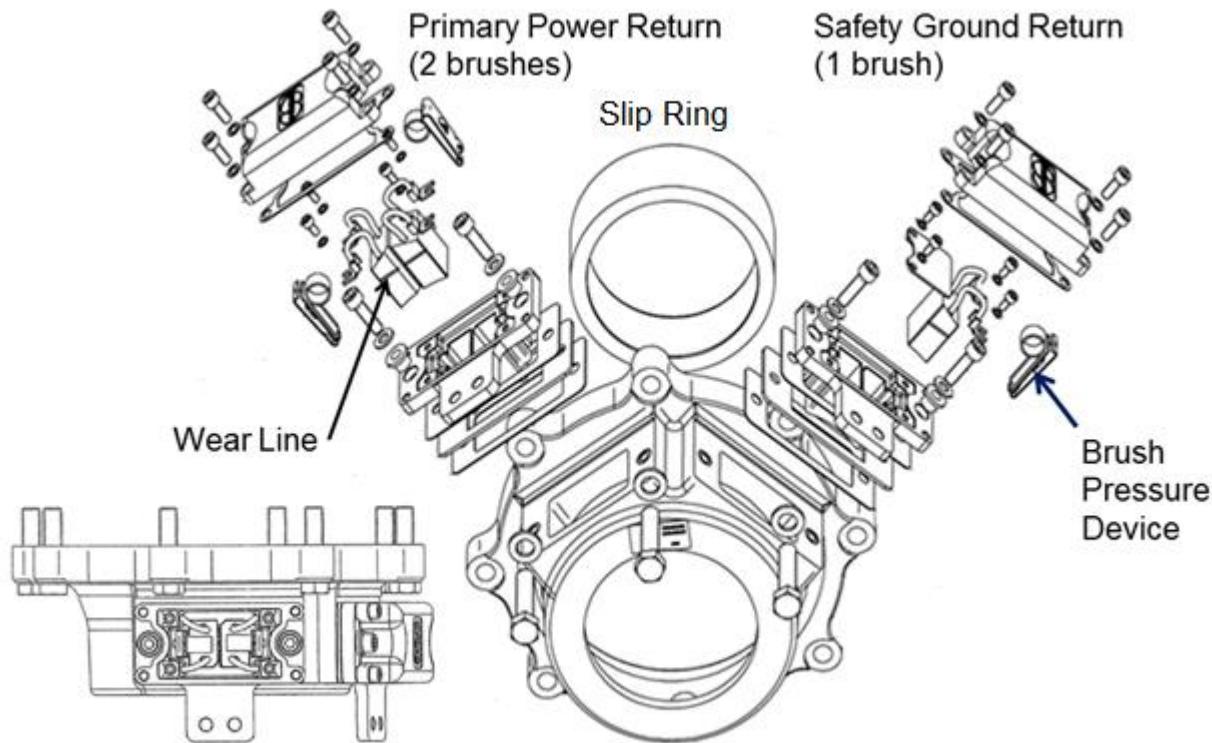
Powered Axle Ground Brush Holder Exploded View
